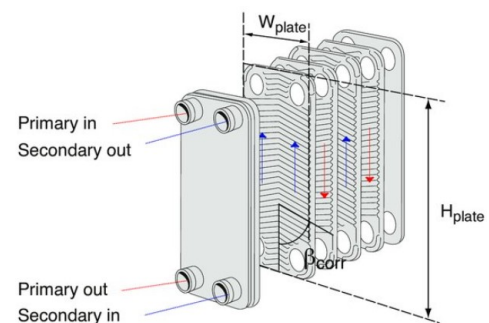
Schematic exploded view of a plate & frame heat exchanger
